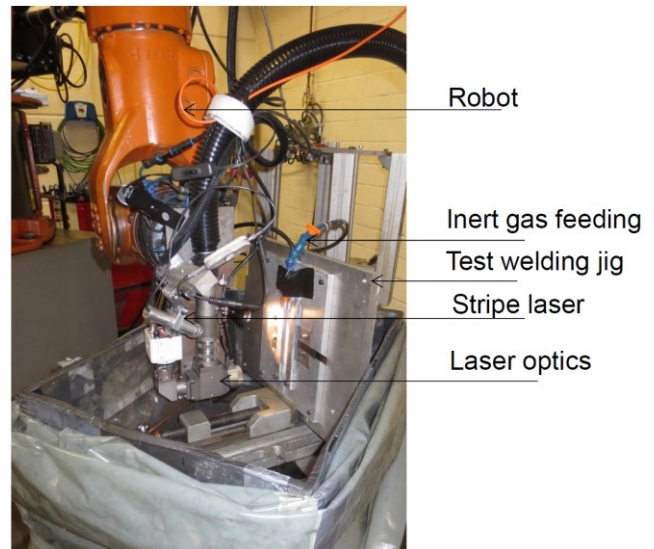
Welding trials on coupons (photo courtesy PHOTON Laser Engineering)
